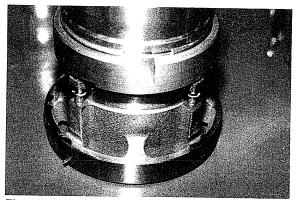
Cylinder Sleeve, Cam Ring and Lift Pin
